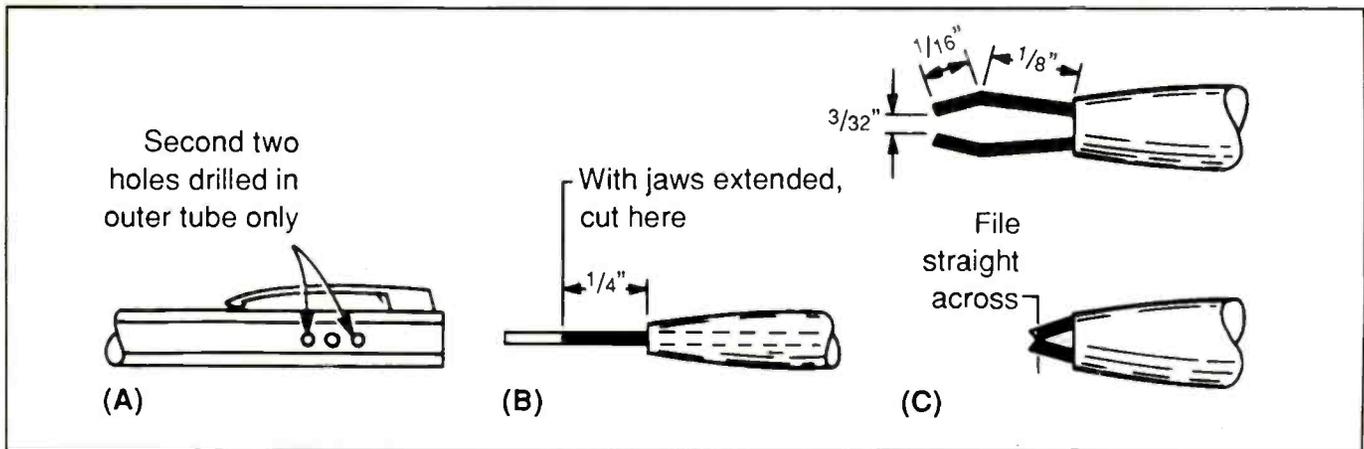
A. A rectangular slot is formed in the outer tube by drilling two additional holes and trimming away the remnants. In B, the ends of the extended springwire are cut 1/4 inch from the end of the outer tube. C. Bend the jaws as shown in the upper drawing. The jaws should close before entering the barrel of the pencil as shown in the lower drawing. Both drawings are about 3 times the actual size.
